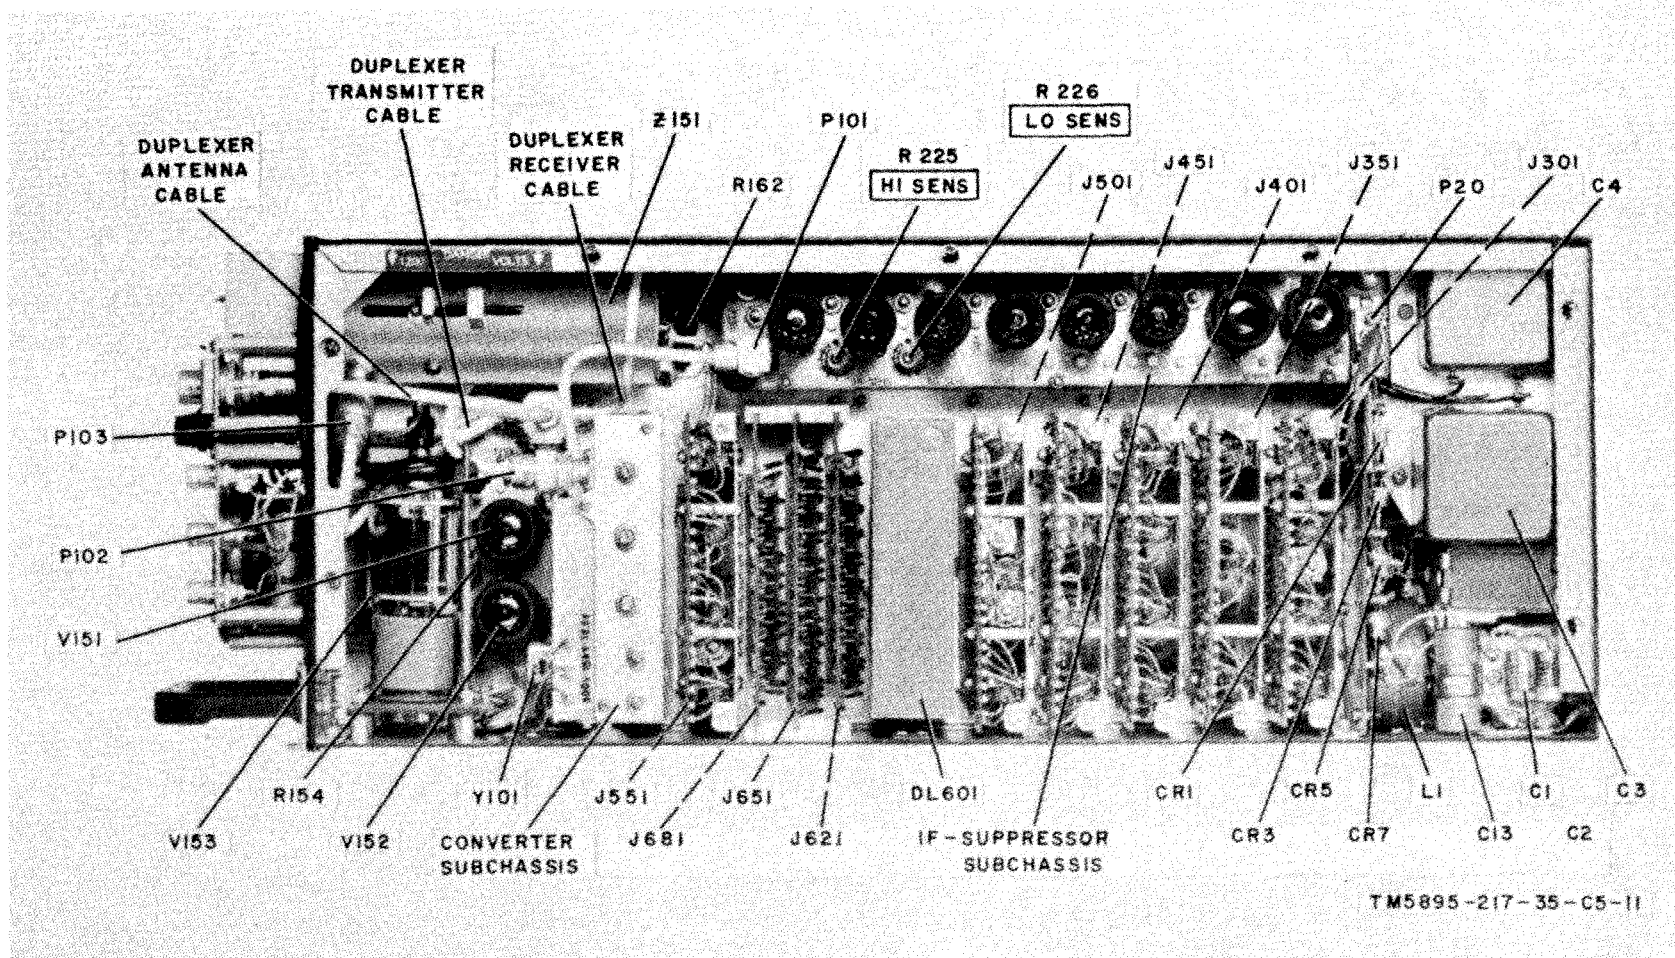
RT-494B/APX-44B, receiver-transmitter, right side view, parts location.
